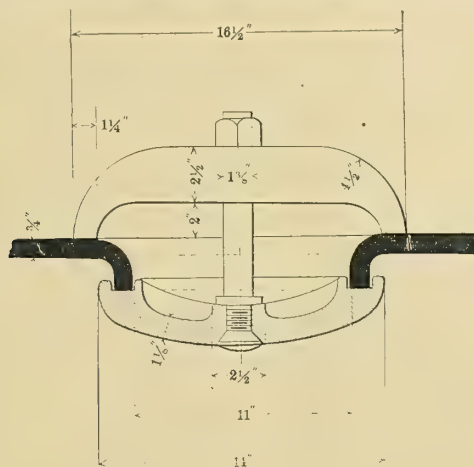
MANHOLE IN FLAT HEAD OF CYLINDRICAL BOILER WITH FLANGED OPENINGS.
